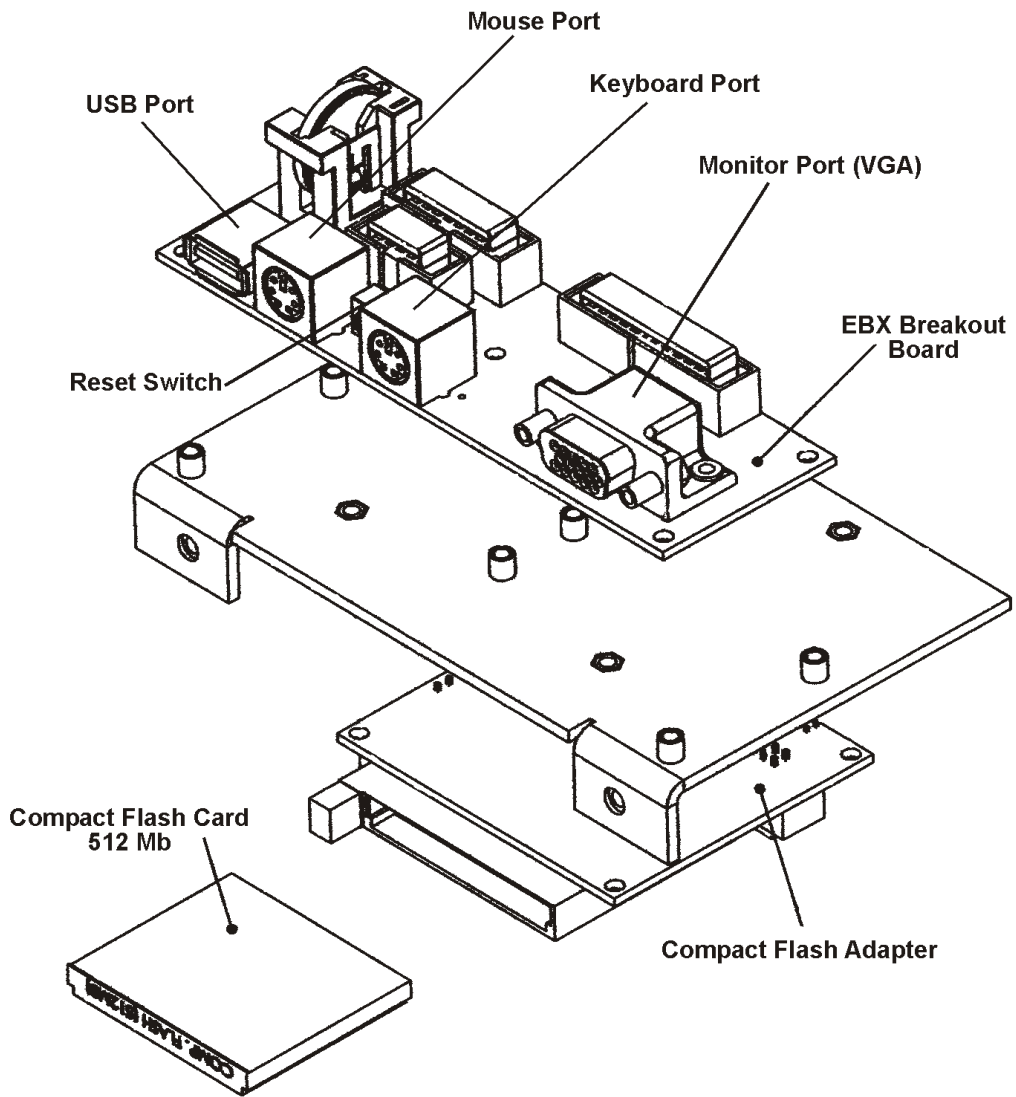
SPCENCL3200 EBX Breakout Board and Compact Flash Installation
